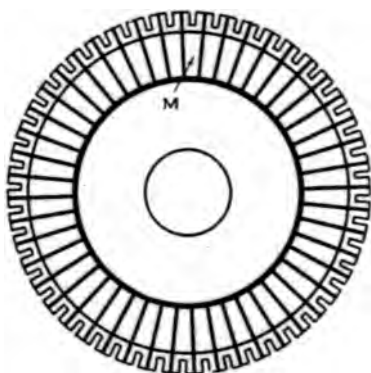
Sectional view of end of commutator showing taper of the segments and slots for coil connections.
